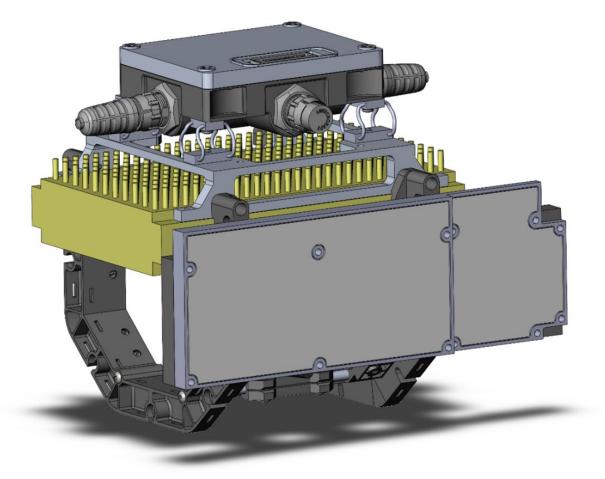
SkyRaider Primary Mount with Payload Installed with Heatsink
